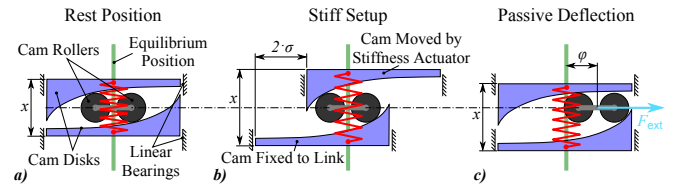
Unwound principle of the FSJ mechanism. A pair of cam rollers located between the cam disks is directly attached to the harmonic drive gear output of the main motor, axially and radially guided by a bearing. The spring is compressed/elongated by a rotational relative movement of the cam disks, as well as by rotational movement of the roller base with respect to both cam disks. The axial force of the compressed spring results in opposing tangential forces that depend on the spatial gradient of the cam disks and the spring compression. a) and b) The joint stiffness can be changed by twisting the cam disks relatively to each other. c) The stiffness characteristics at a given stiffness preset is a result of the "floating spring" compression due to passive deflection and both cam disk gradients.
